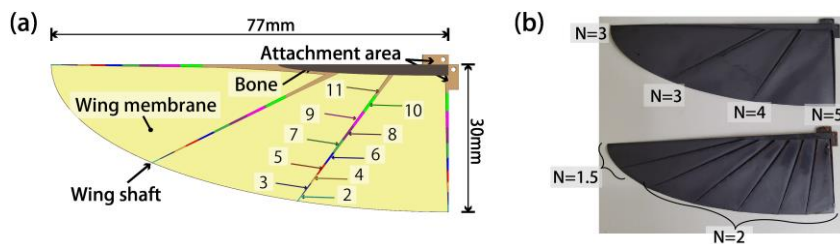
(a) Design of the 4-shafts. (b) Fabricated 4-shafts and 8-shafts wings ( $N$  indicates the number of the representative wing shafts).
